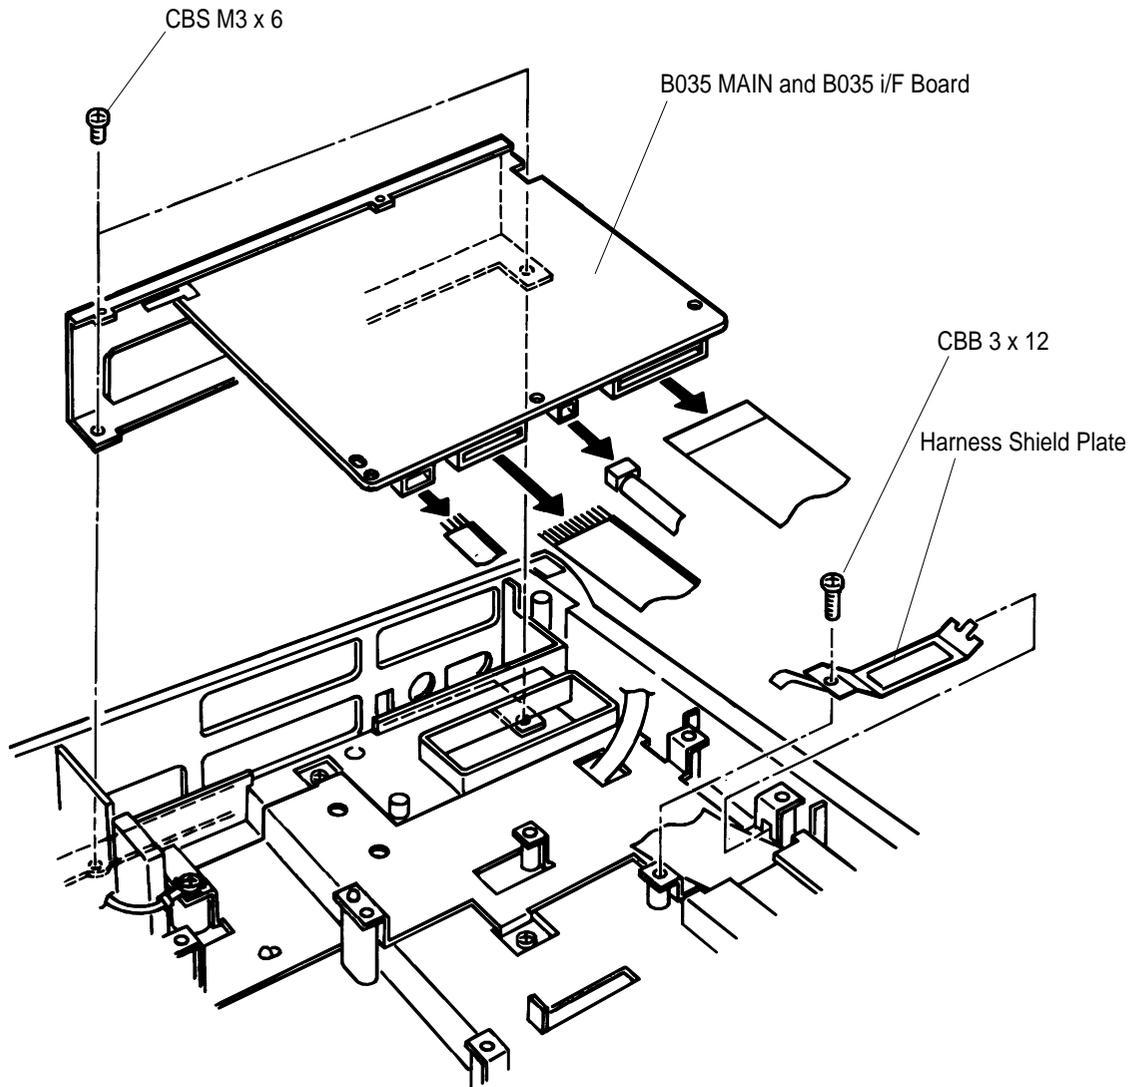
Removing the B035 MAIN and B035 I/F Board
